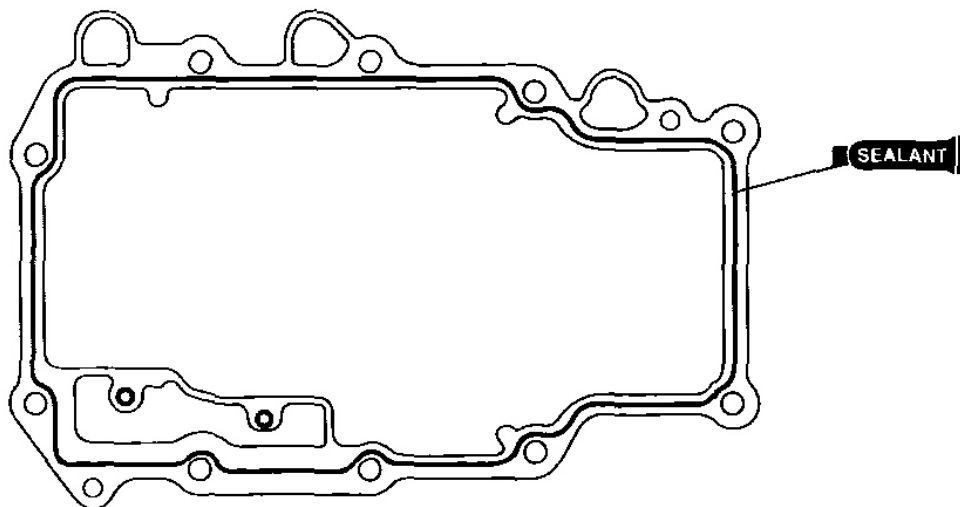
Applying Sealant To Contact Surfaces Of Extension Housing & Transmission Case
